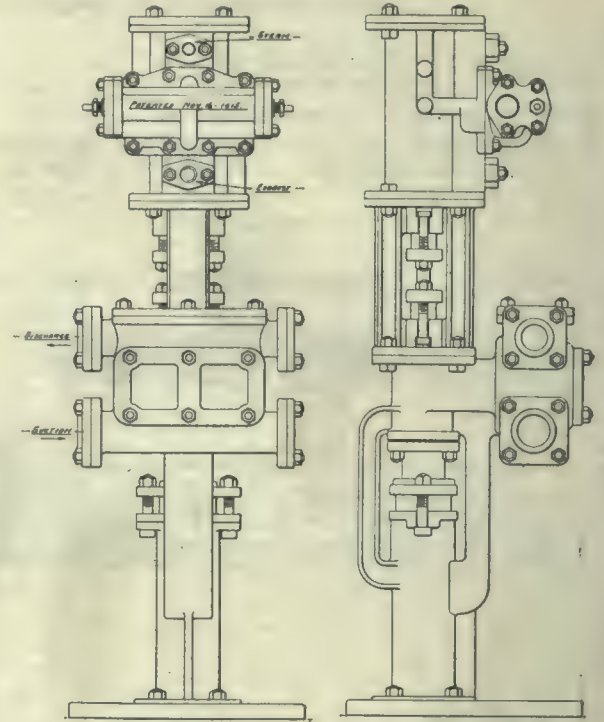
FRONT ELEVATION OF OUTSIDE PACKED RAM PUMP.
